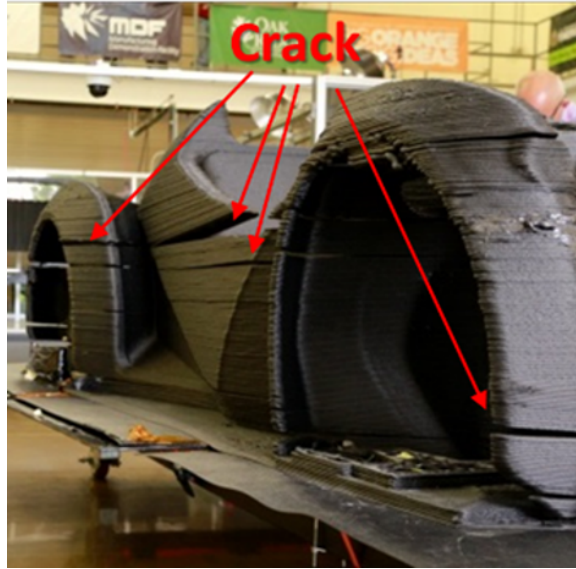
Crack Defects Due to Improper Print Surface Temperature
